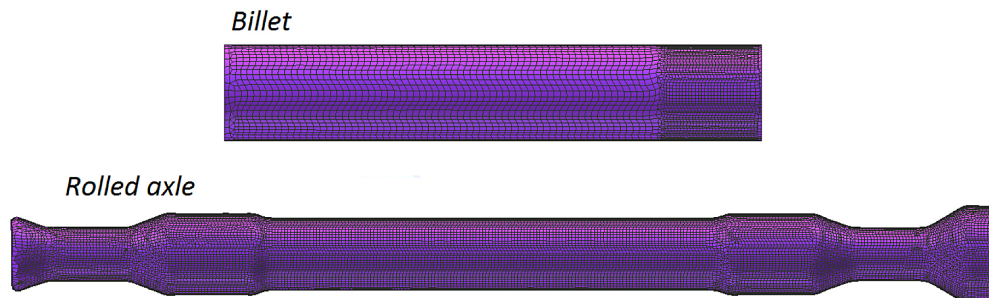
View of the billet and the formed part, divided into hexahedral-type elements
